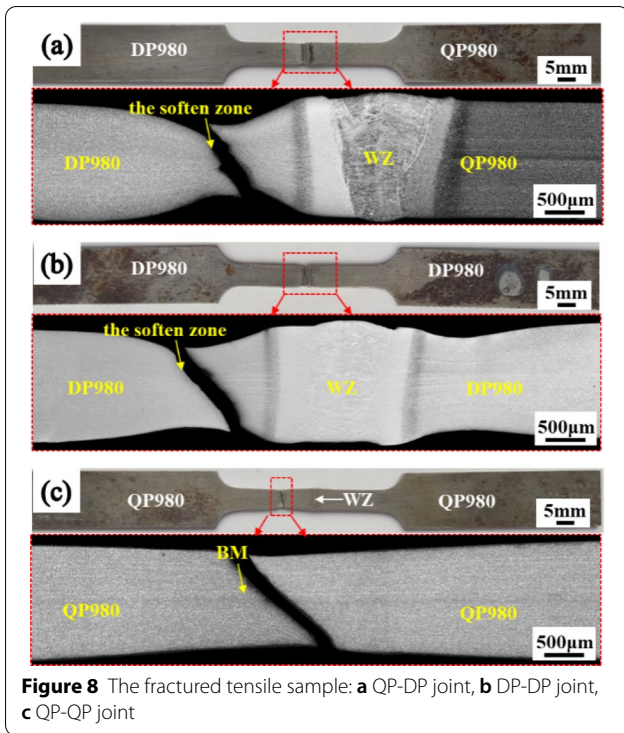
The fractured tensile sample: a QP-DP joint, b DP-DP joint, c QP-QP joint
